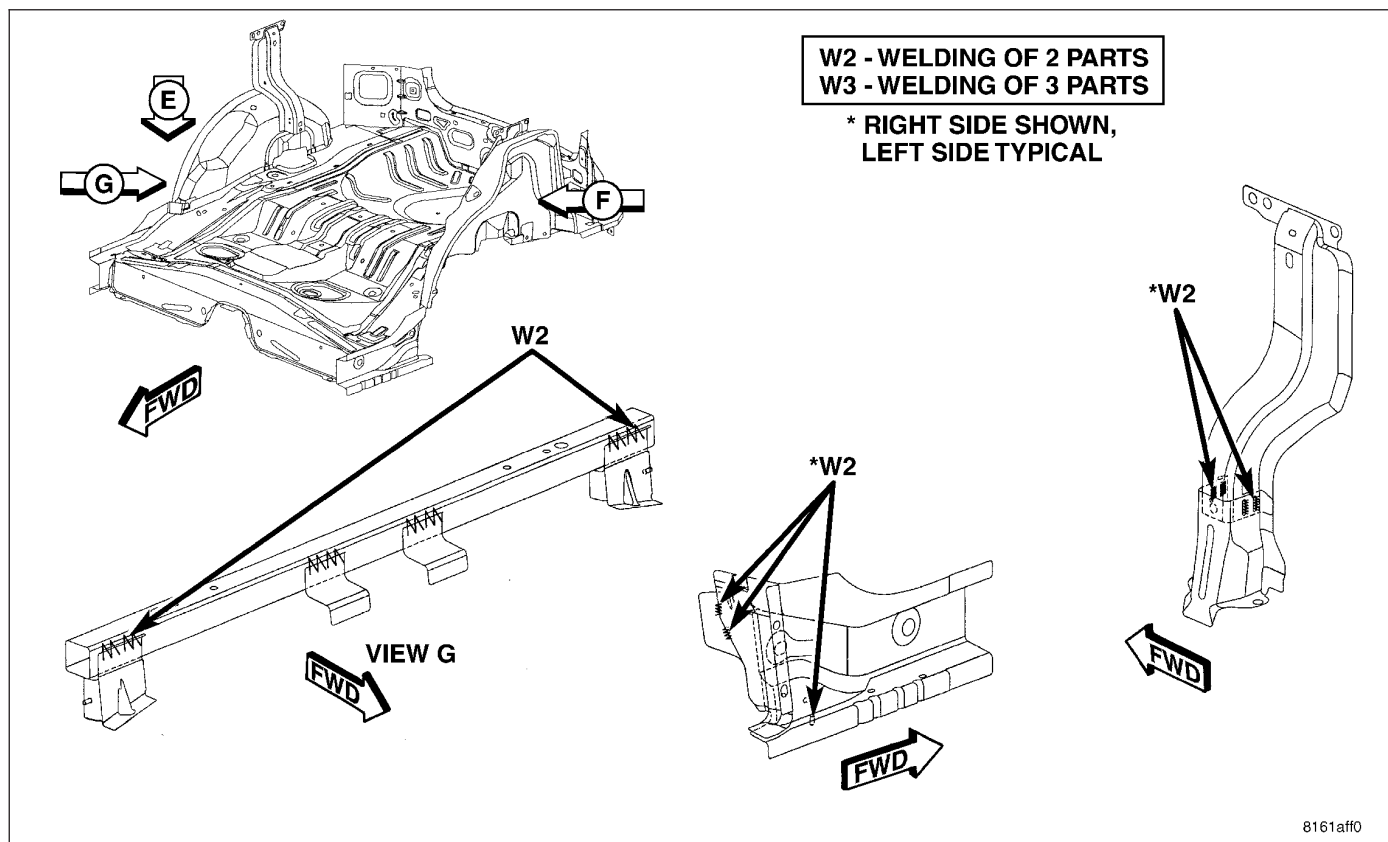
REAR FLOOR ASSEMBLY (12 OF 14)
